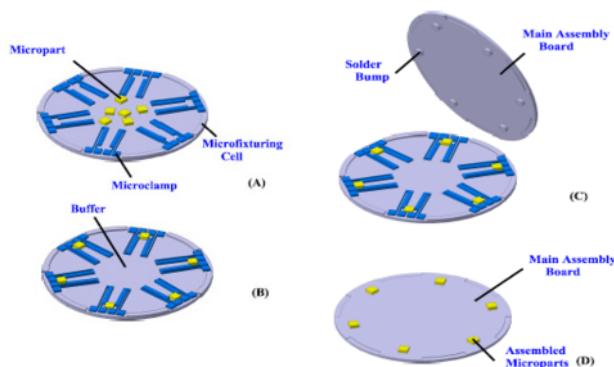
Four stages of assembly process, A. Parts are feeded on the buffer, B. Parts are positioned by inducing ultrasonic vibration on rotary table, C. Actuated microclamps trap the parts, D. Flip-chip technique transfer parts to main assembly board.
